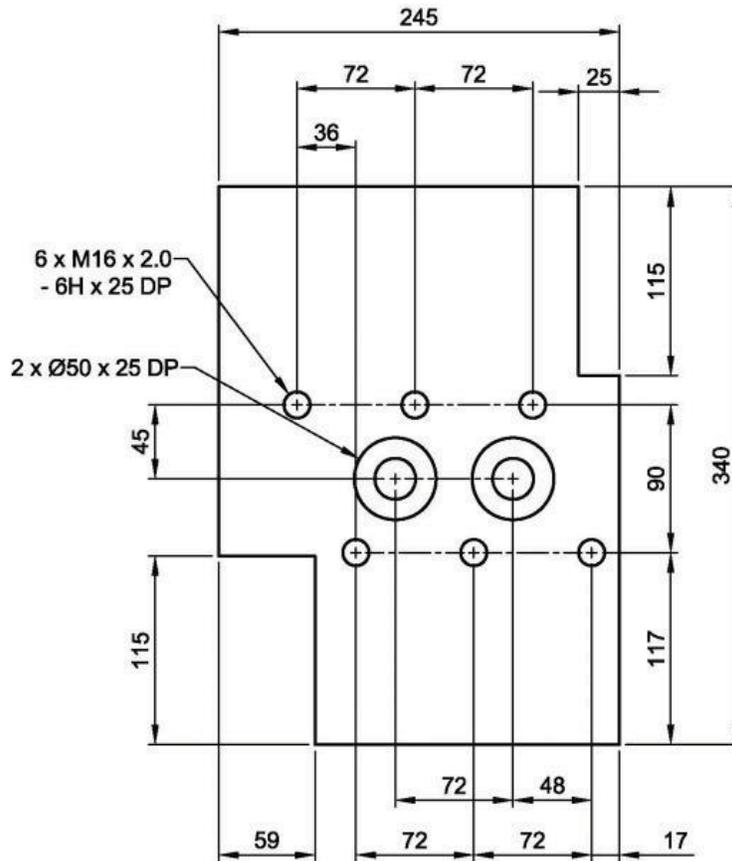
Forward Hydroplane RSU Baseplate Mounting Hole Dimensions
